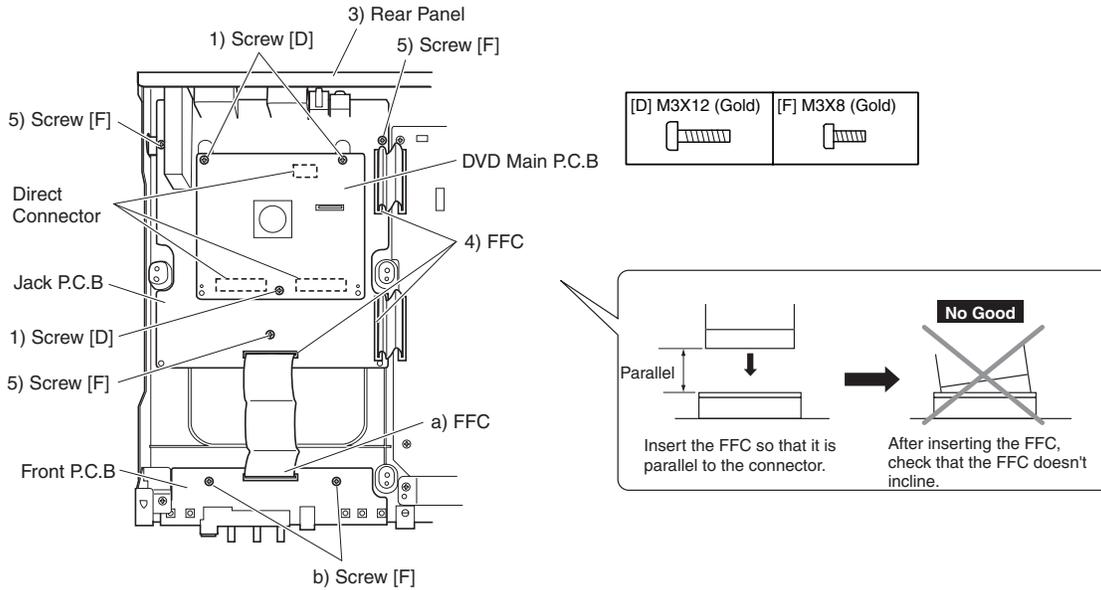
DVD Main P.C.B, Jack P.C.B and Front P.C.B
